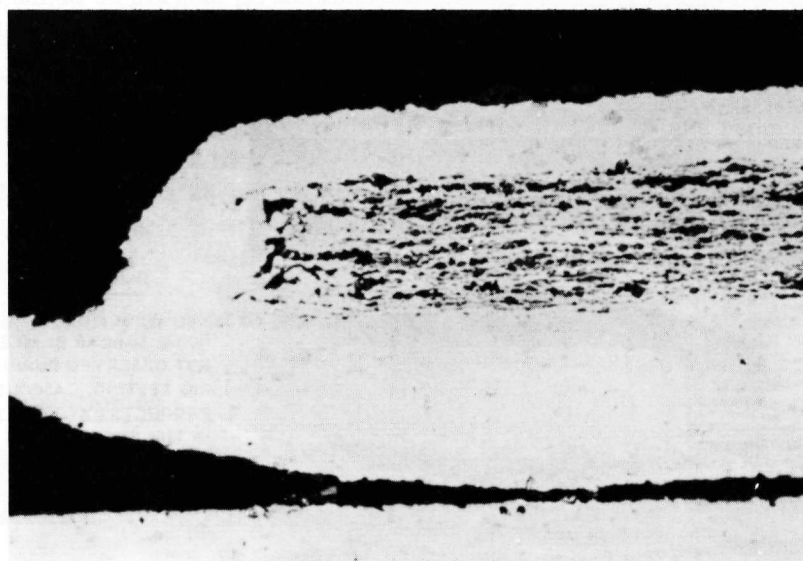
End seal blister from weld-sealed segment end
